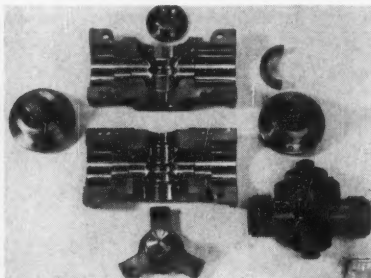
Opened view of a mold used to cast a cock (lower right). End caps, top and bottom inserts are shown also.
